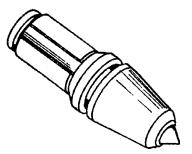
Bullet Type Tooth Retained with retainer ring. Use C-123 bit puller (below) to remove. Drive in tooth, retainer ring will hold tooth in place. DO NOT hit carbide tip with hammer.
